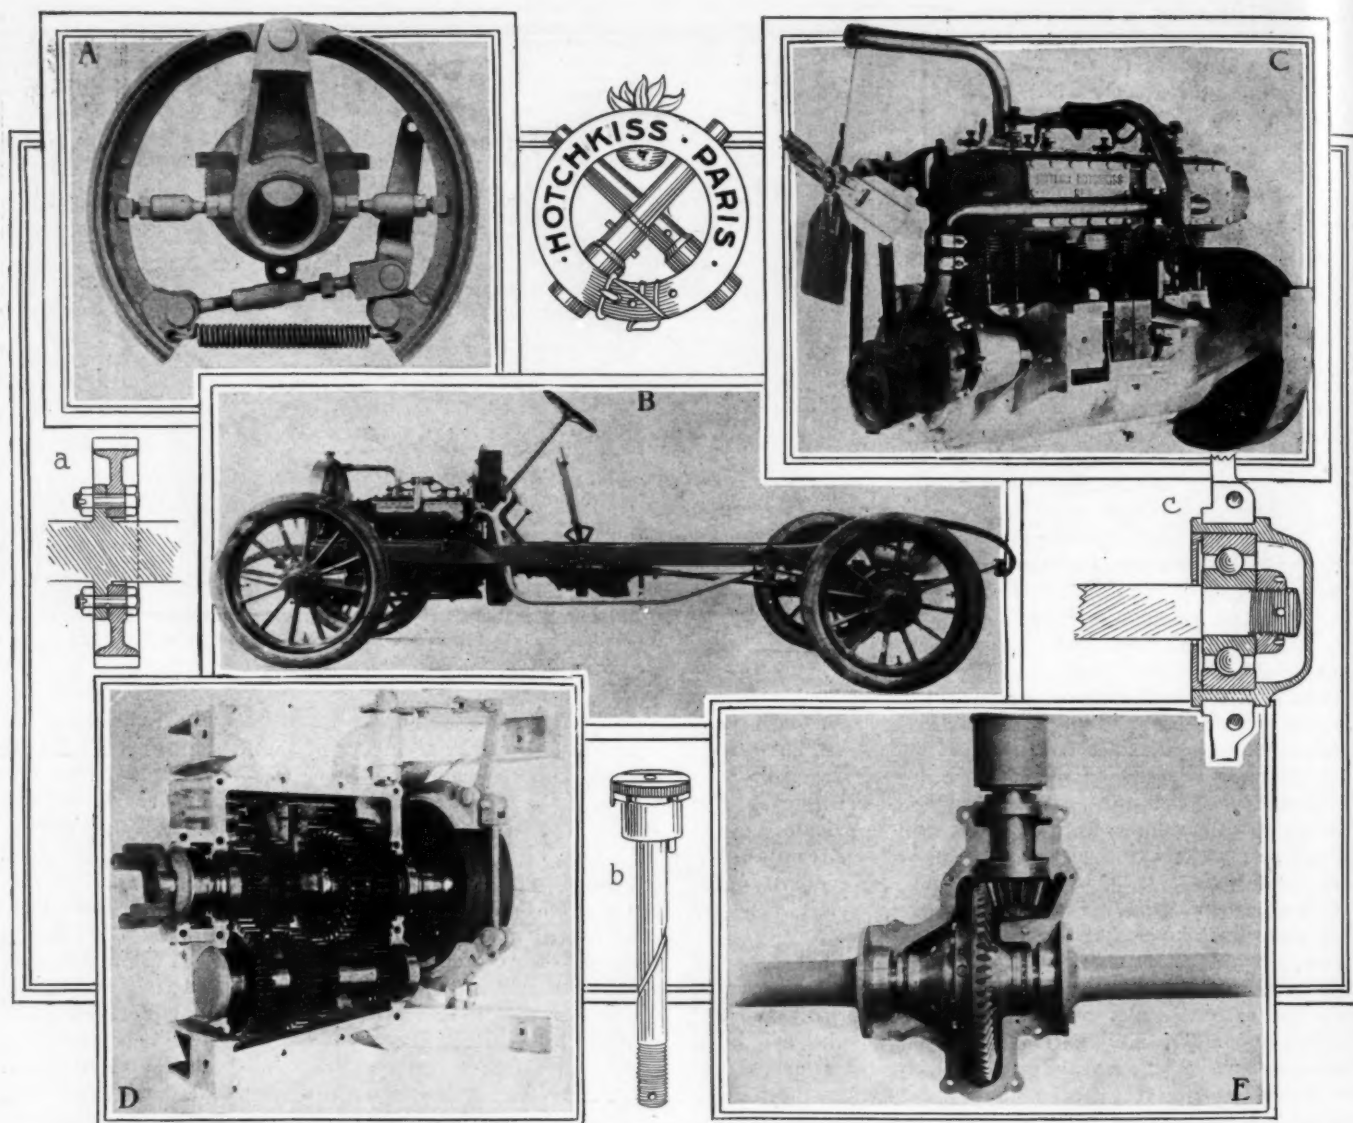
Model T Hotchkiss showing the chassis side view motor, transmission gear, bevel drive, brake mechanism, and other details
